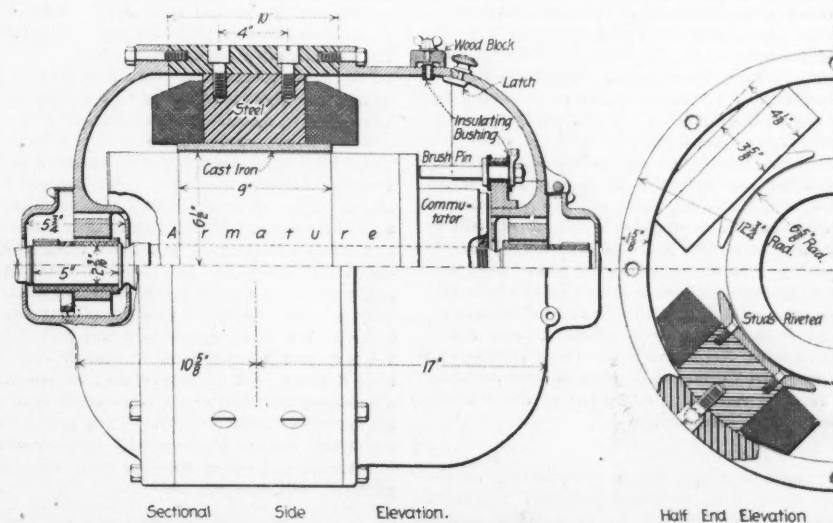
SECTIONAL ELEVATIONS OF GENERATOR, SHOWING DETAILS OF FIELD MAGNET AND ARMATURE BEARINGS.
